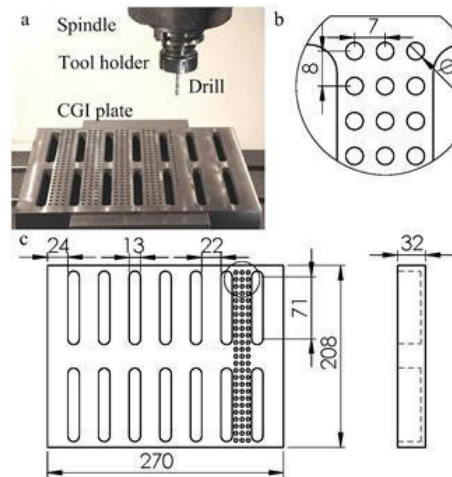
(a) Drilling experiment setup; (b) hole layout on the CGI plate; and (c) dimensions of CGI plate.
